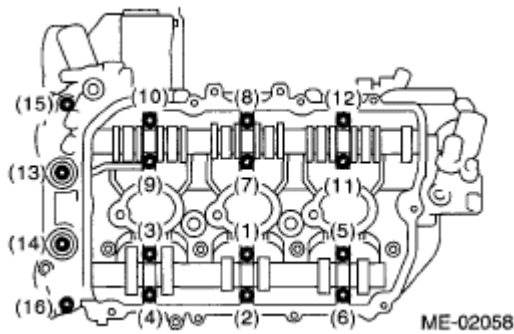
Identifying Rocker Cover Bolts Tighten Sequence
